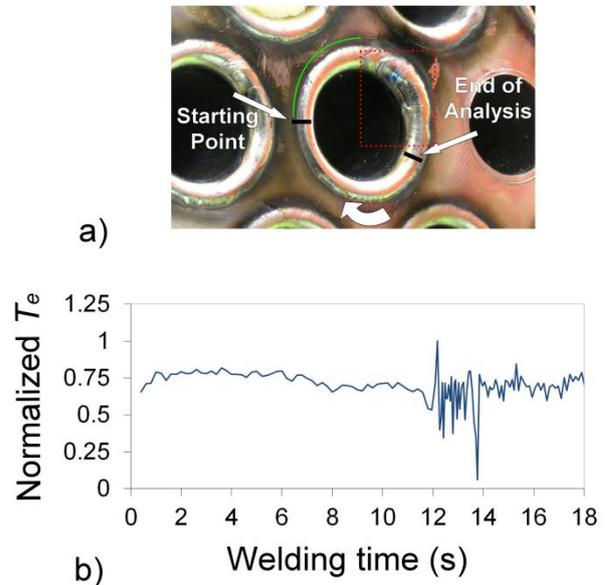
Example of implementation in field trials for the nuclear sector: a) defective tube-to-tubesheet orbital arc-welding process; b) associated  $T_e$  profile indicating the appearance of the defect.
